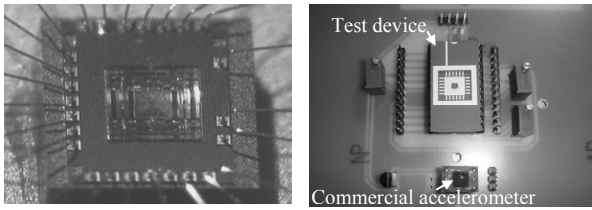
The accelerometer chip, (a) after wire bonding and packaged in ceramic housing, and (b) assemble on test board.
